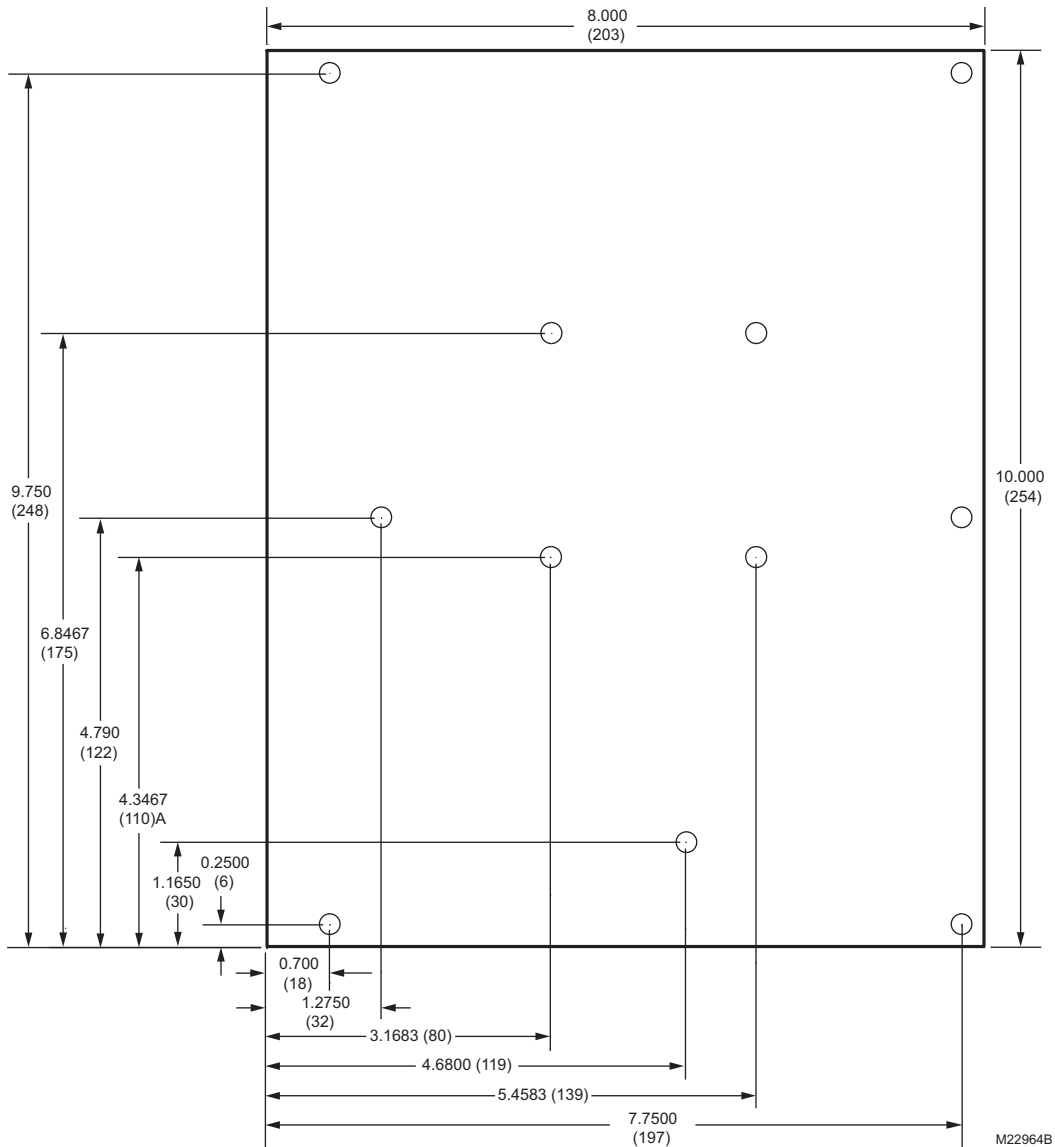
Enclosure mounting hole locations for the Q7800H1018, 1026, 1034, 1059, 1067, and 1091 Subbase Panel, dimensions in in. (mm).
